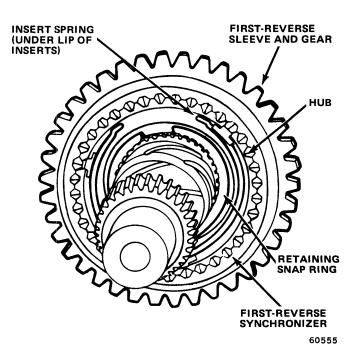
Snap Ring and Insert Spring Position in First-Reverse Hub
